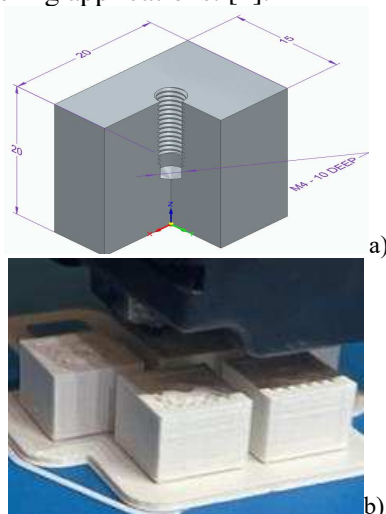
Sample presentation: a) Virtual dimensions, b) 3D printed manufacturing
